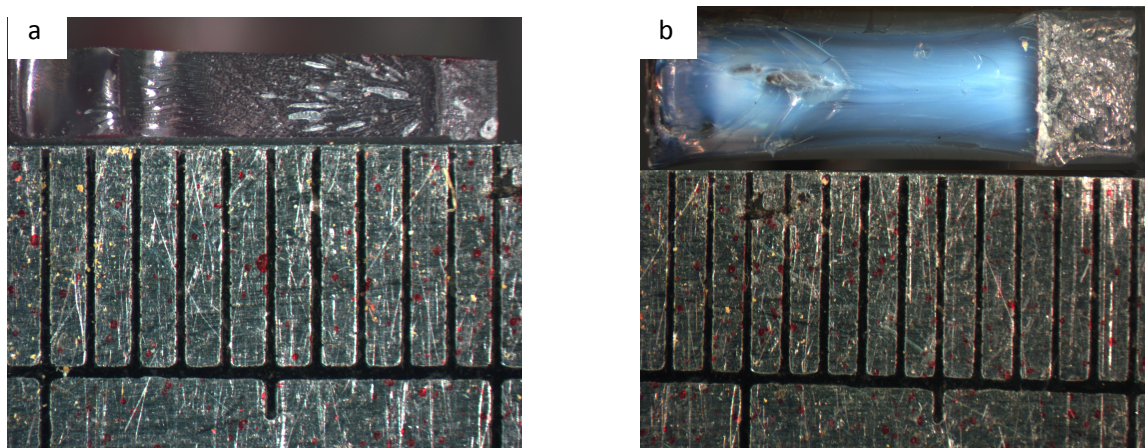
Fracture surface of compressed (a) and injected (b) SABIC PC/PDMS.
